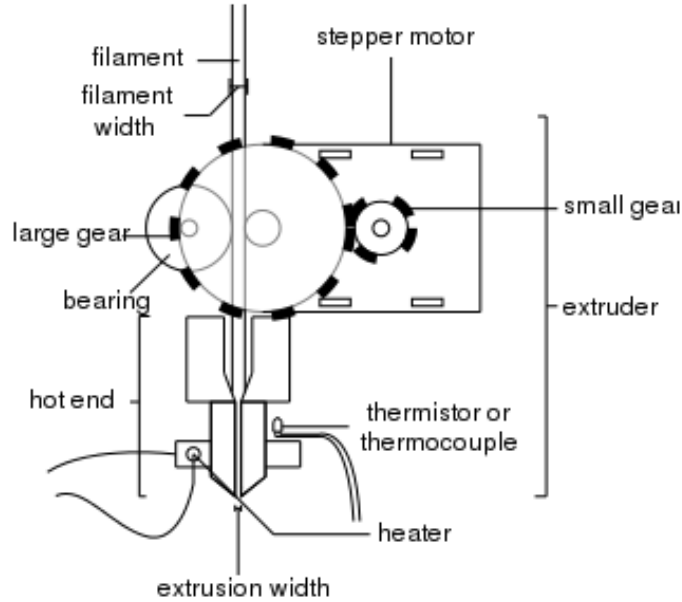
FDM Extruder Mechanical Sub-assembly
